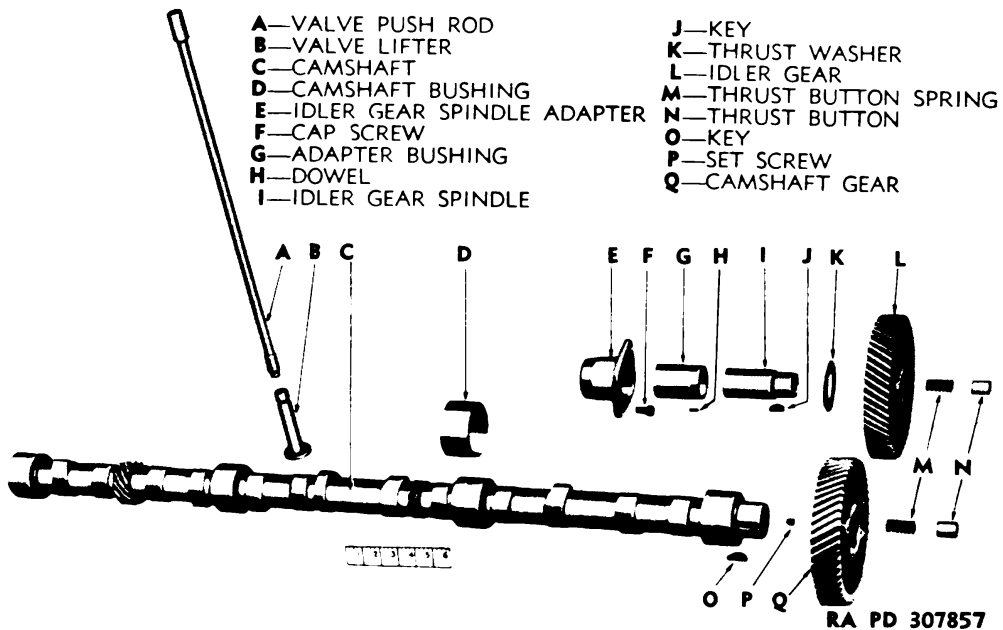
Camshaft and Idler Gear Assemblies Disassembled
